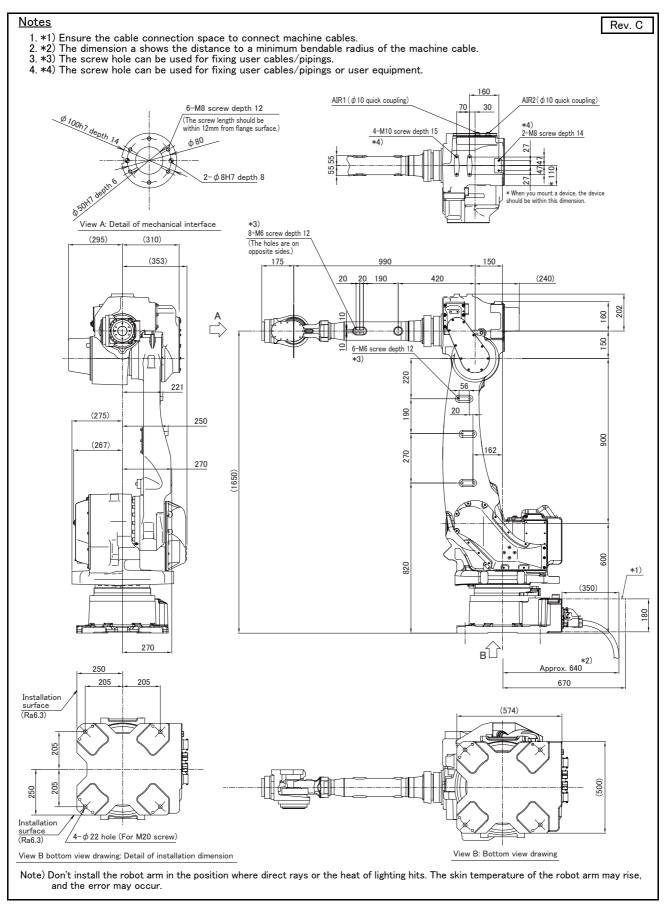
Outside dimensions: RV-35FM/50FM/70FM (Oilmist specification)
